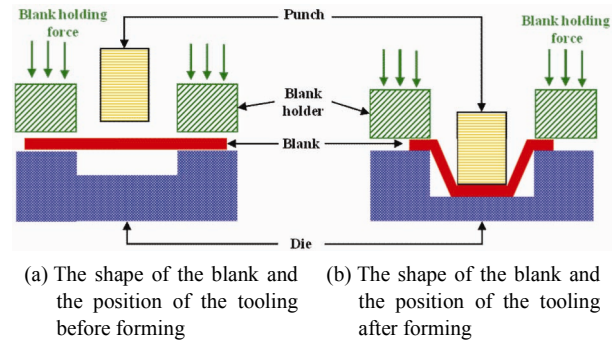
Schematic view of the tooling when forming the sheet metal.
